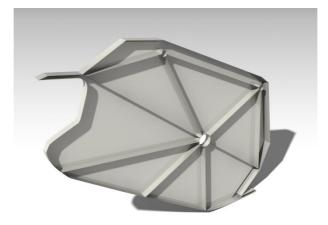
Sidewall panel design with circumferential fillet and outer dimensions (CTC GmbH)
